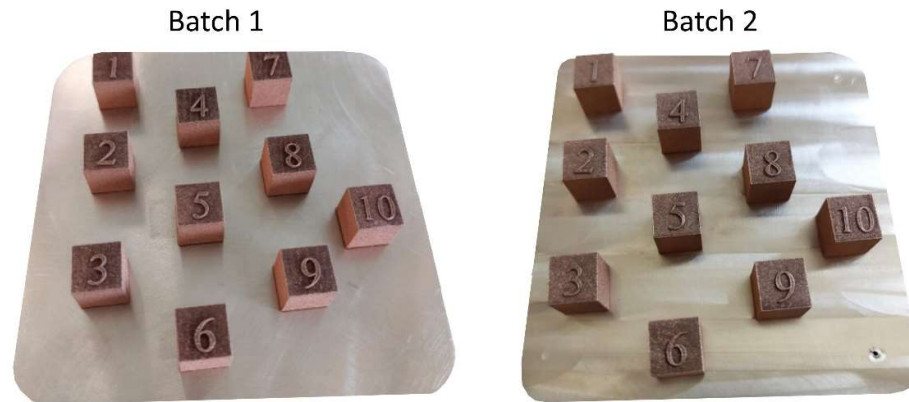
Batch 1 and 2 of CuNi₂SiCr cubes produced by low-power red laser machine.
